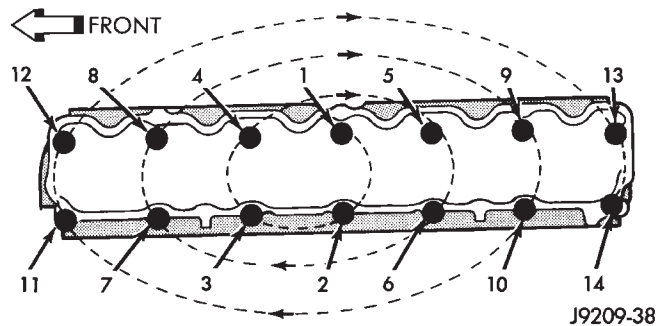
Cylinder Head Cover Gasket Locator Pins at #8 & #9
